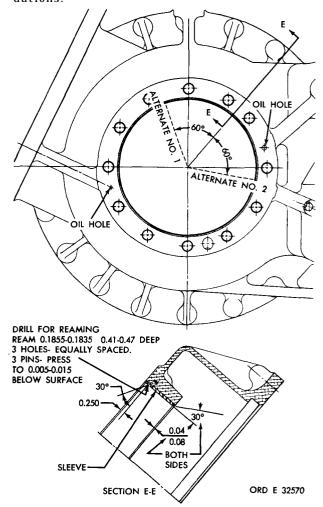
Location of input transfer drive gear support sleeve retaining pins
